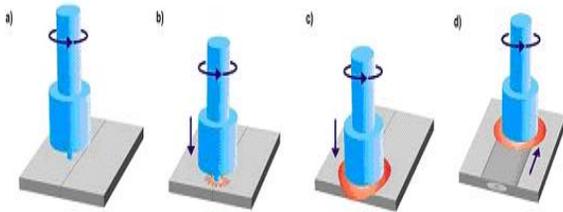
a) Top holding on side b) Rotation of this path c) plug in seated d) end of path tool.
